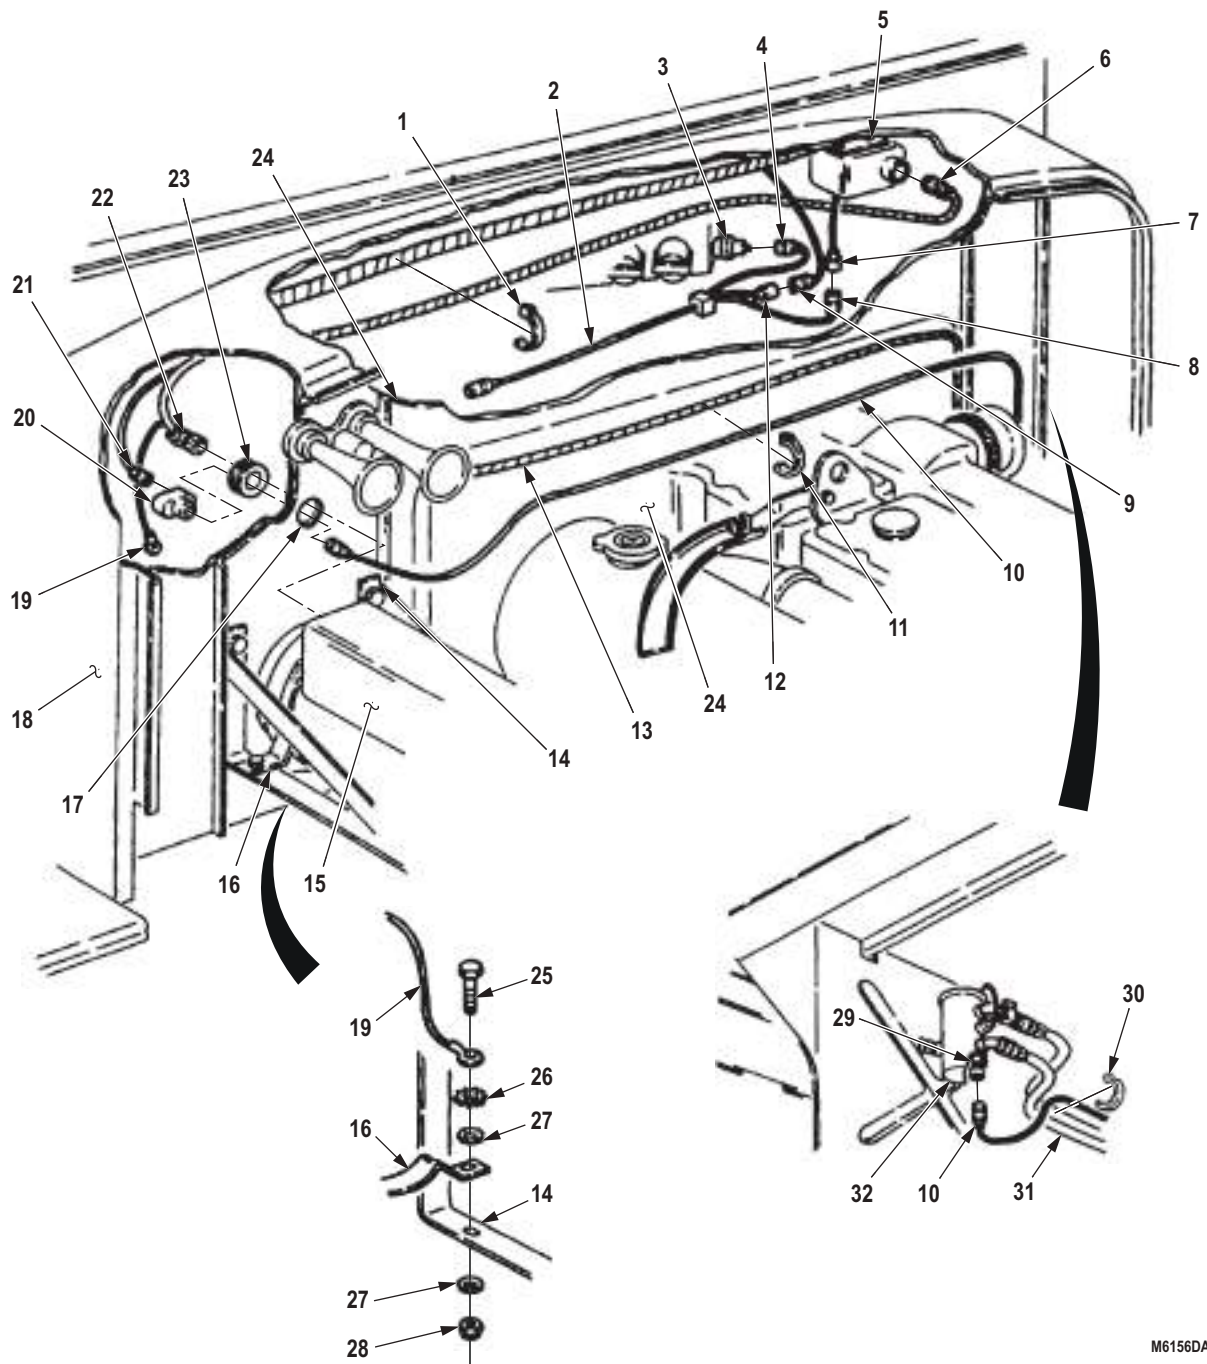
Personnel Fuel Burning Heater Wiring Harness Removal.
